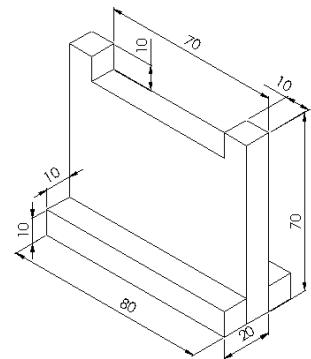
, Isometric view of outlet stand CAD drawing, dimensions in millimetres.
